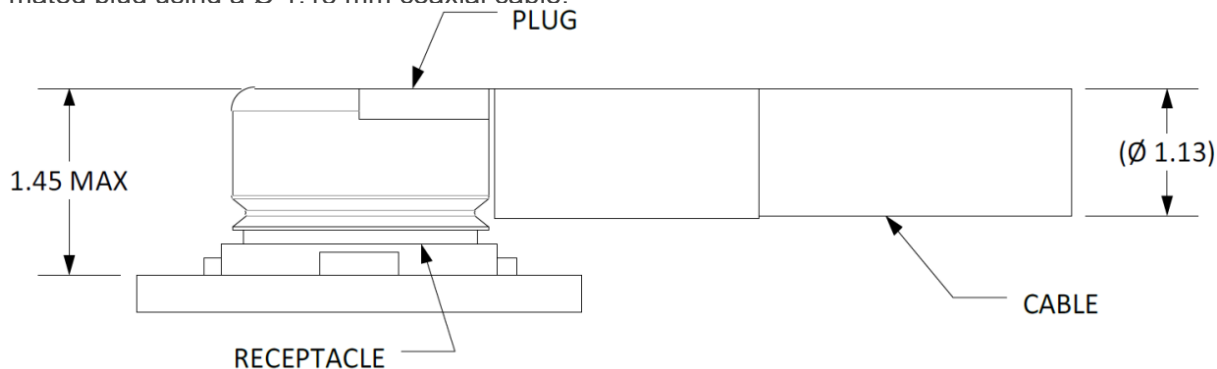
Space Factor of Mated Connectors (Ø 1.13 mm Coaxial Cables) (Unit: mm)
